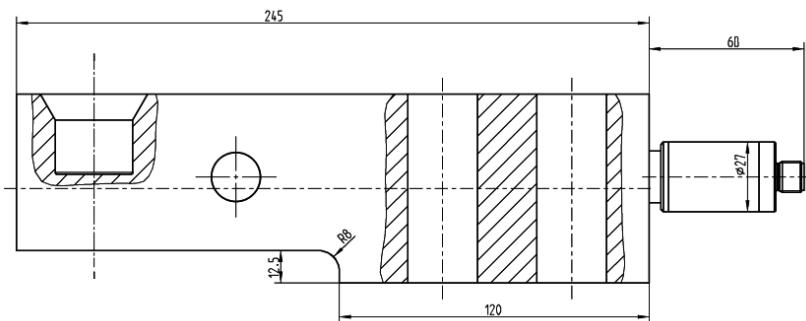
Dimensions of 30 kN to 100 kN shear beam (option with blind hole)
